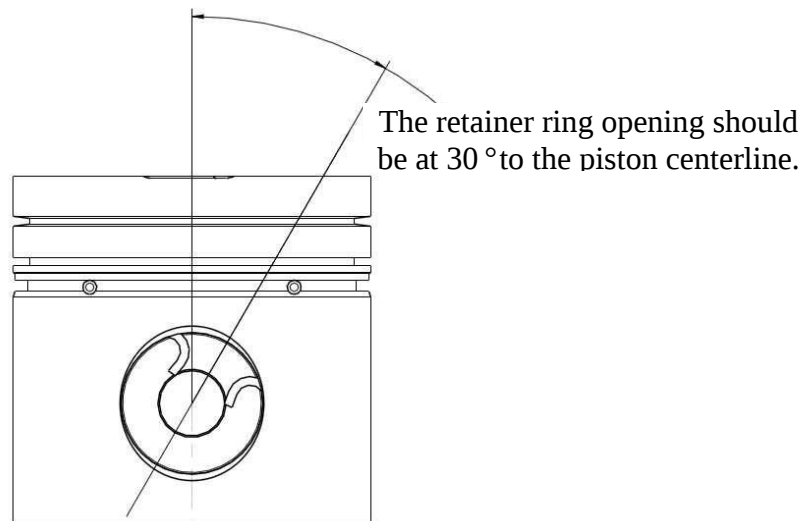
Schematic Diagram for Assembly of Piston Pin Circlip
